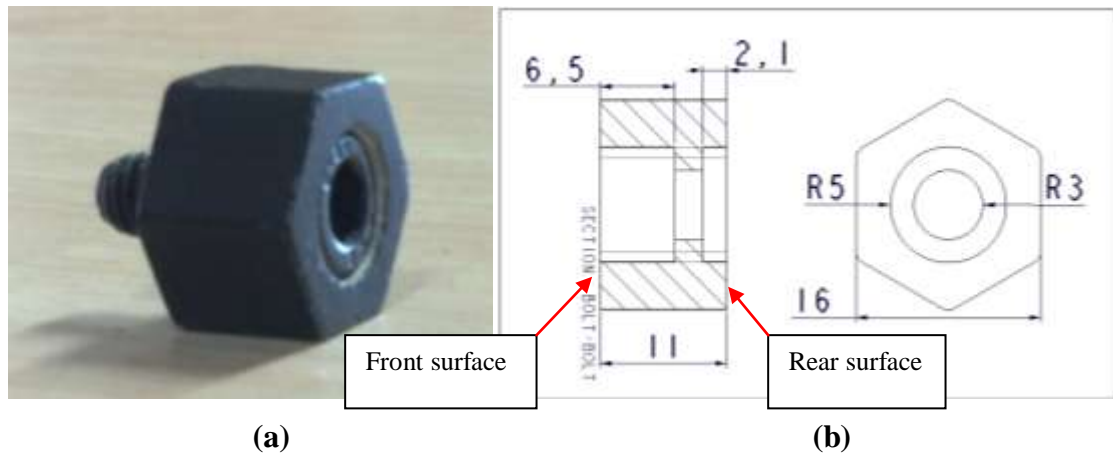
(a) Hexagonal bolt head with M6 cap screw. (b) Bolt head dimensions (mm).
